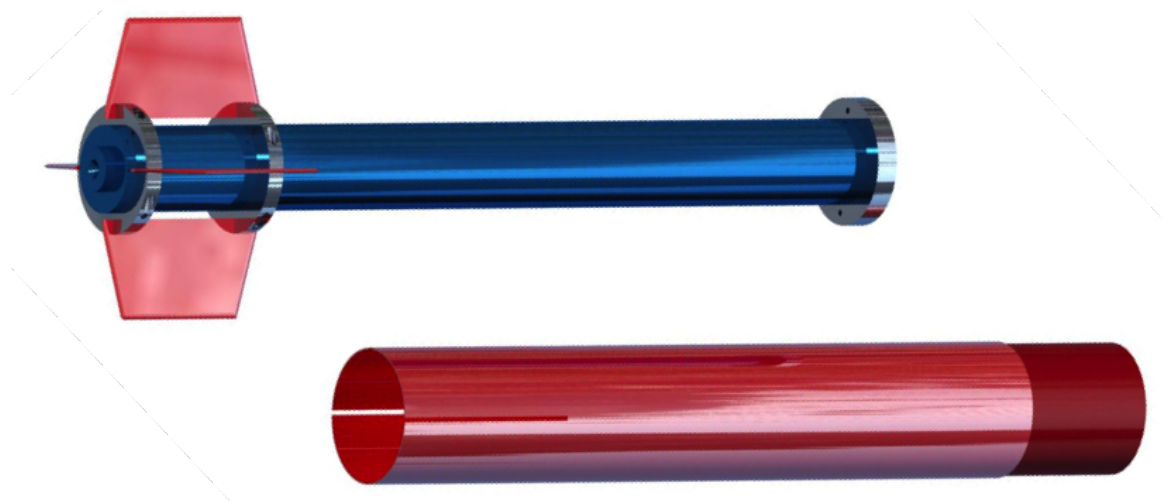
Detailed view of the rocket motor casing, thrust structure, stabilization fins, and housing tube.
